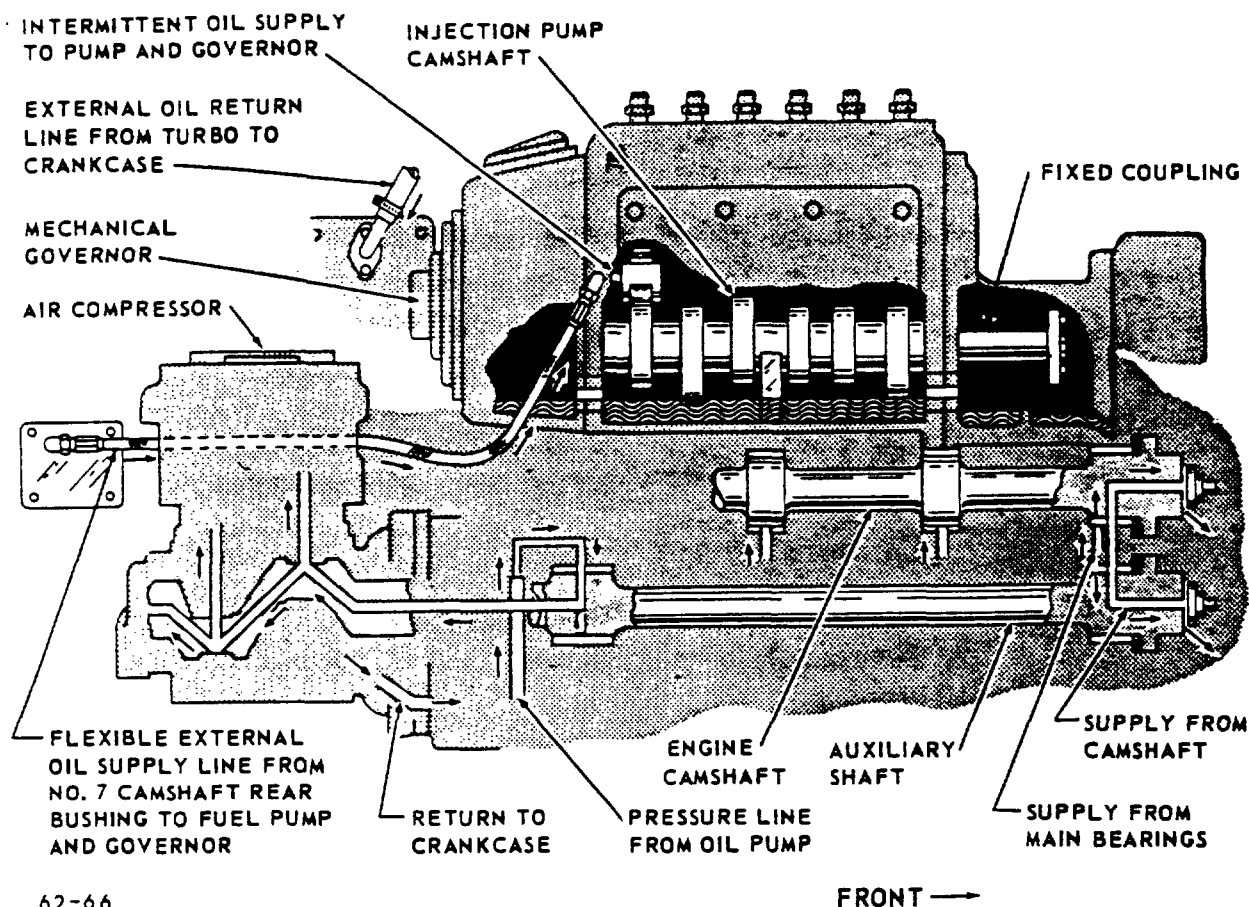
Auxiliary Drive and Injection Pump Lubrication
